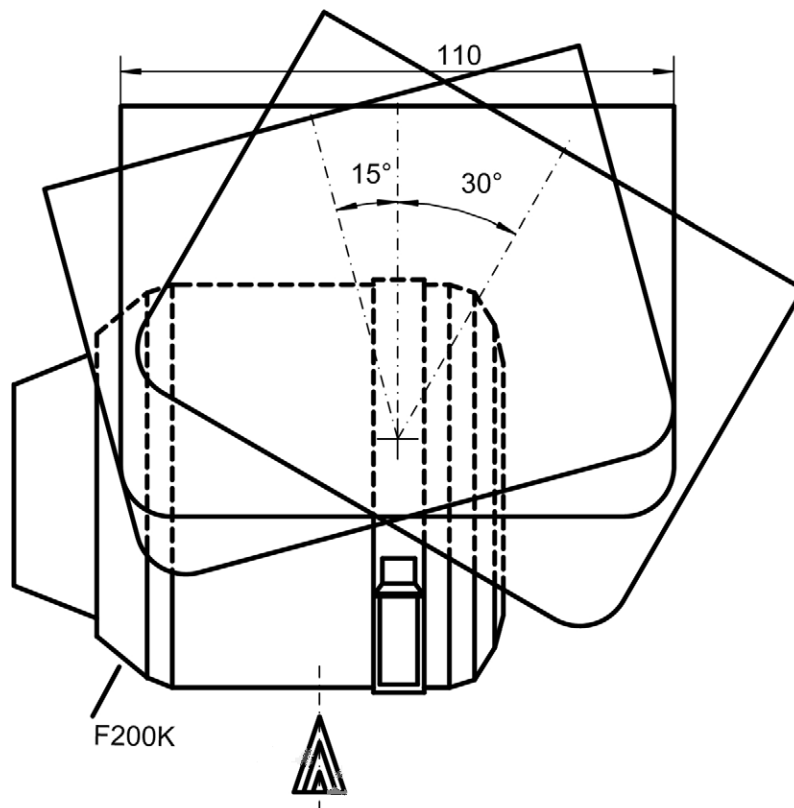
Mounting variation of weather shields type 659R6030 (side view)
